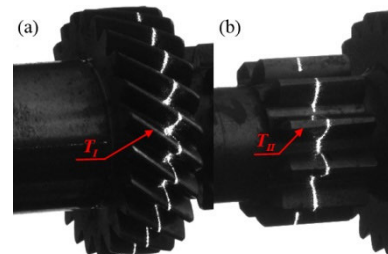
Two light stripe images: (a) is gear shaft I and (b) is gear shaft II.
